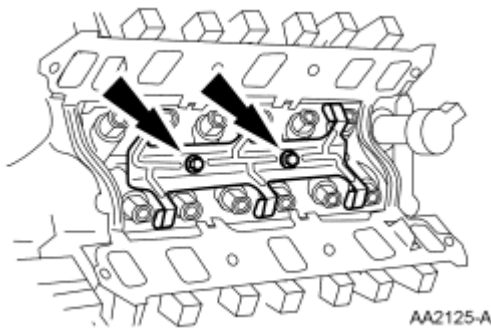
Locating Hydraulic Lash Adjuster Guide Plate Retainer
